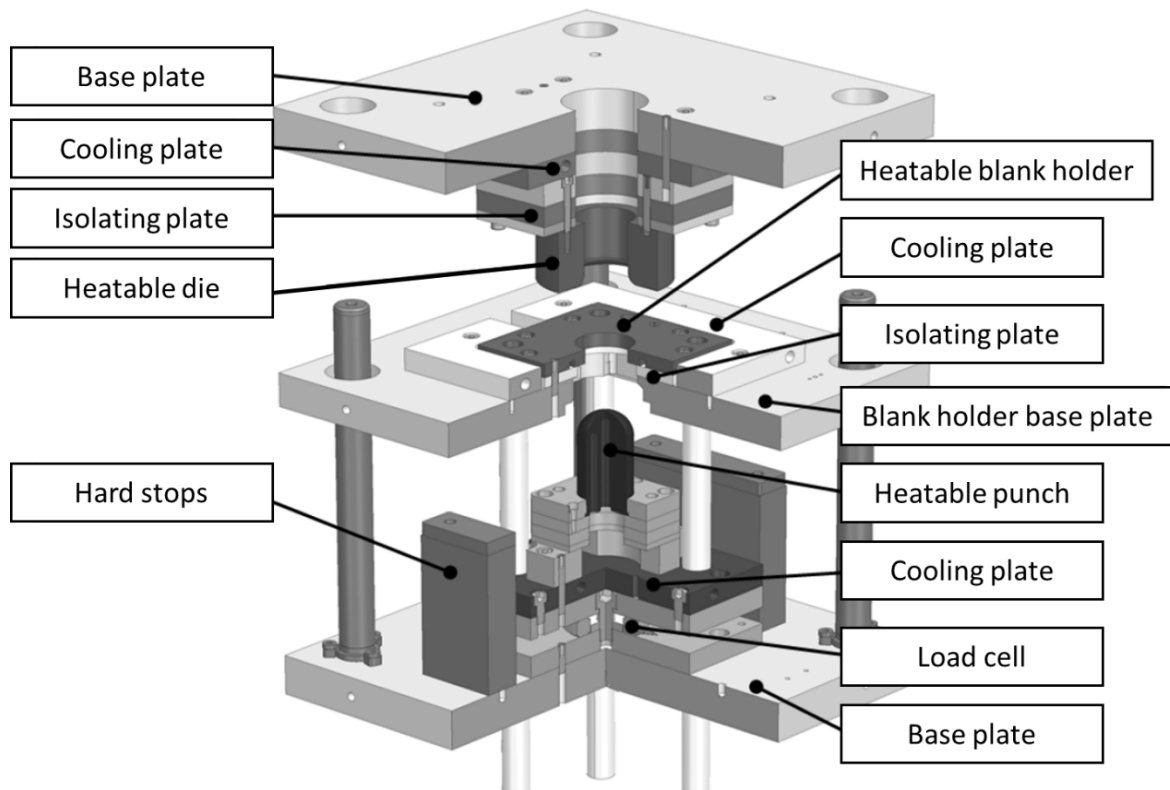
Drawing tool for forming metal sheet up to 550 ° C. According to [55].
